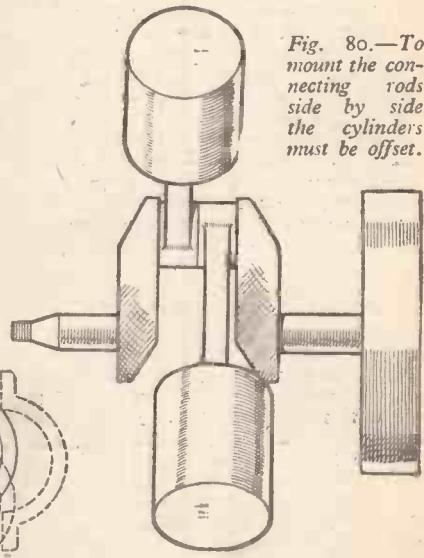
To mount the connecting rods side by side the cylinders must be offset.
